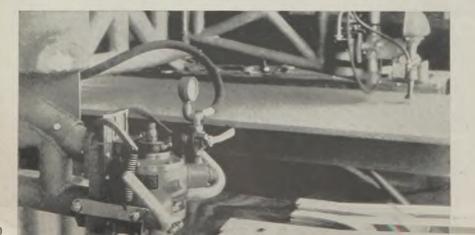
Onsrud superspeed air turbine-driven milling head, as adapted by engineers of Beech Aircraft Corp. to perform templet-guided end mill cutting of panels from stacked metal sheets. Three-stage impulse reaction turbine units such as this develop 3-horsepower at 15,000 revolutions per minute. Beechcraft photo
